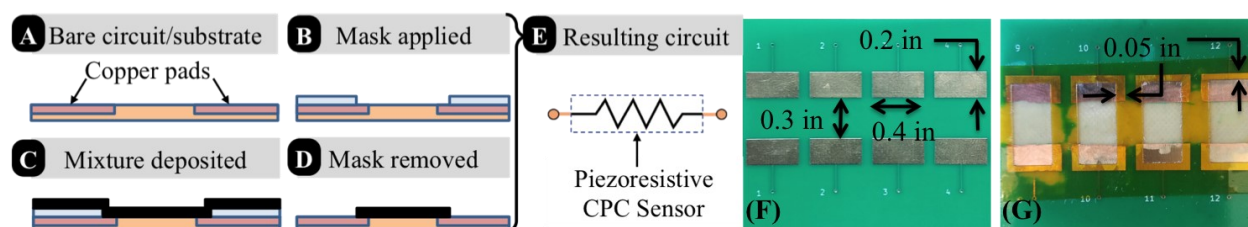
(A-E) Schematic representation of the creation of PCB sample substrates; (F) PCB without solder mask and (G) after abrasive preparation with Kapton solder mask applied
